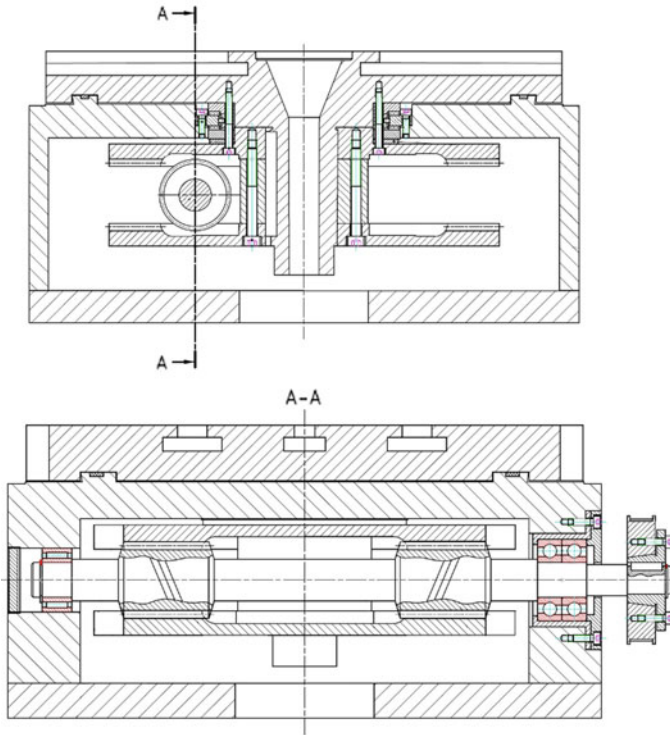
Rotary table disc driven by the two helical gears attached to the same shaft, that work together with one flat face gear
